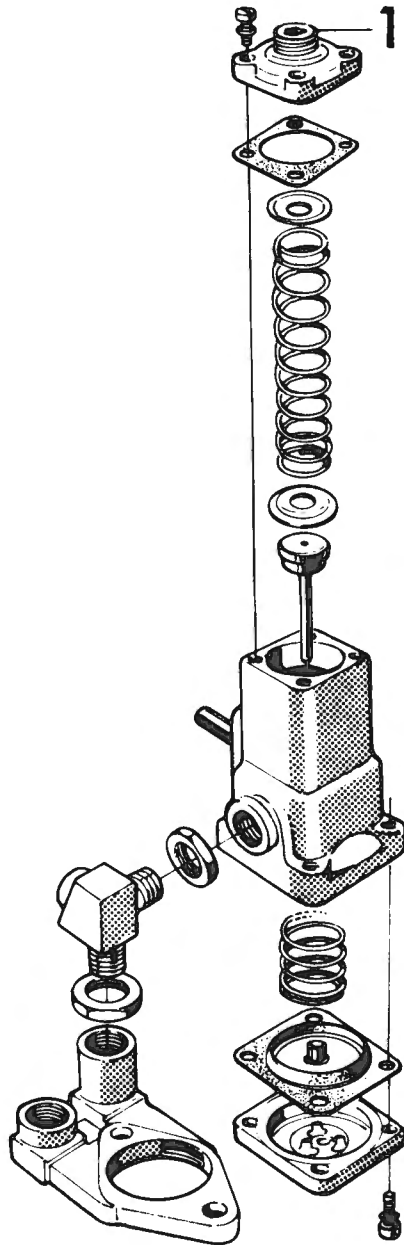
Explodes view of the decel. valve - FoMoCo, USA version 1970 onwards.
